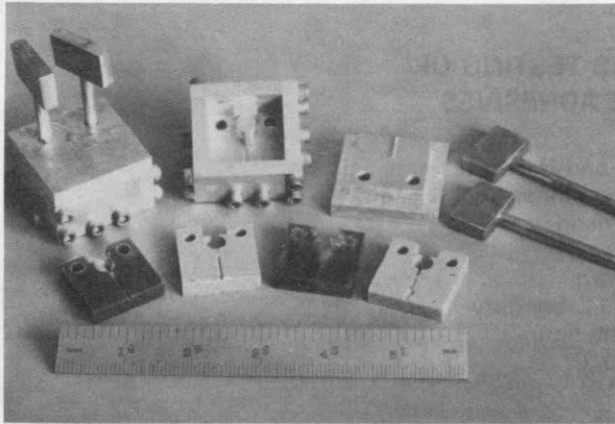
Aluminum mold and adhesive compact tension specimens.
